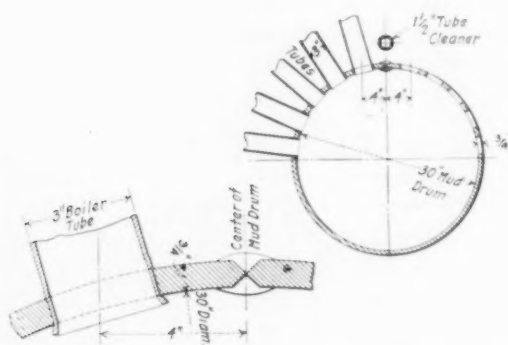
CROSS-SECTION OF MUD DRUM, SHOWING ELECTRIC WELD WHICH IS NOT IN CONTACT WITH FIRE
